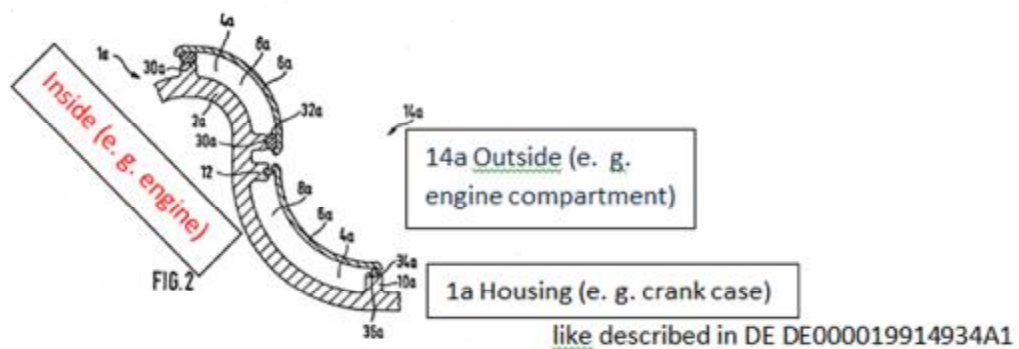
Drawing/cross section for thermal (and acoustical) shielding of a machine housing
